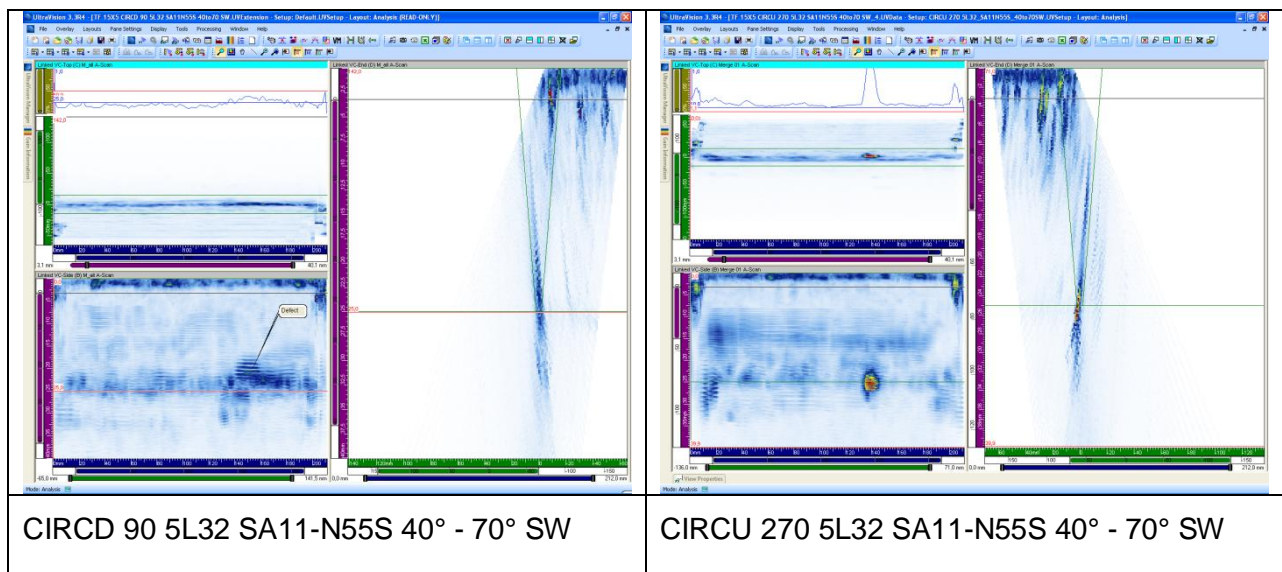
General views of weld TF scanned with technique PA-2 using 5 MHz probe.
